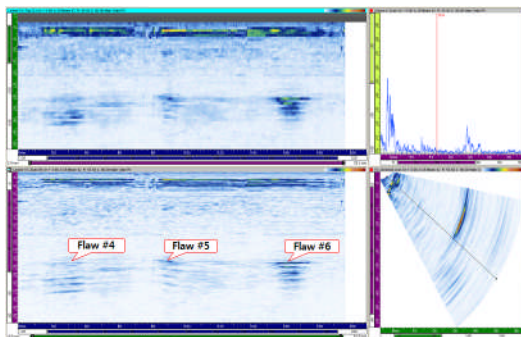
Signal analysis result of 2" socket weld flawed specimen
